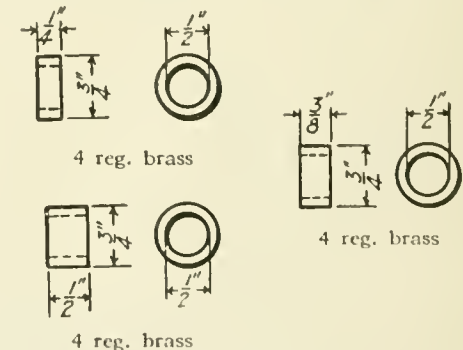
Dimensions of the collars which are forced over the tubes and soldered in place gripping the lens-board
